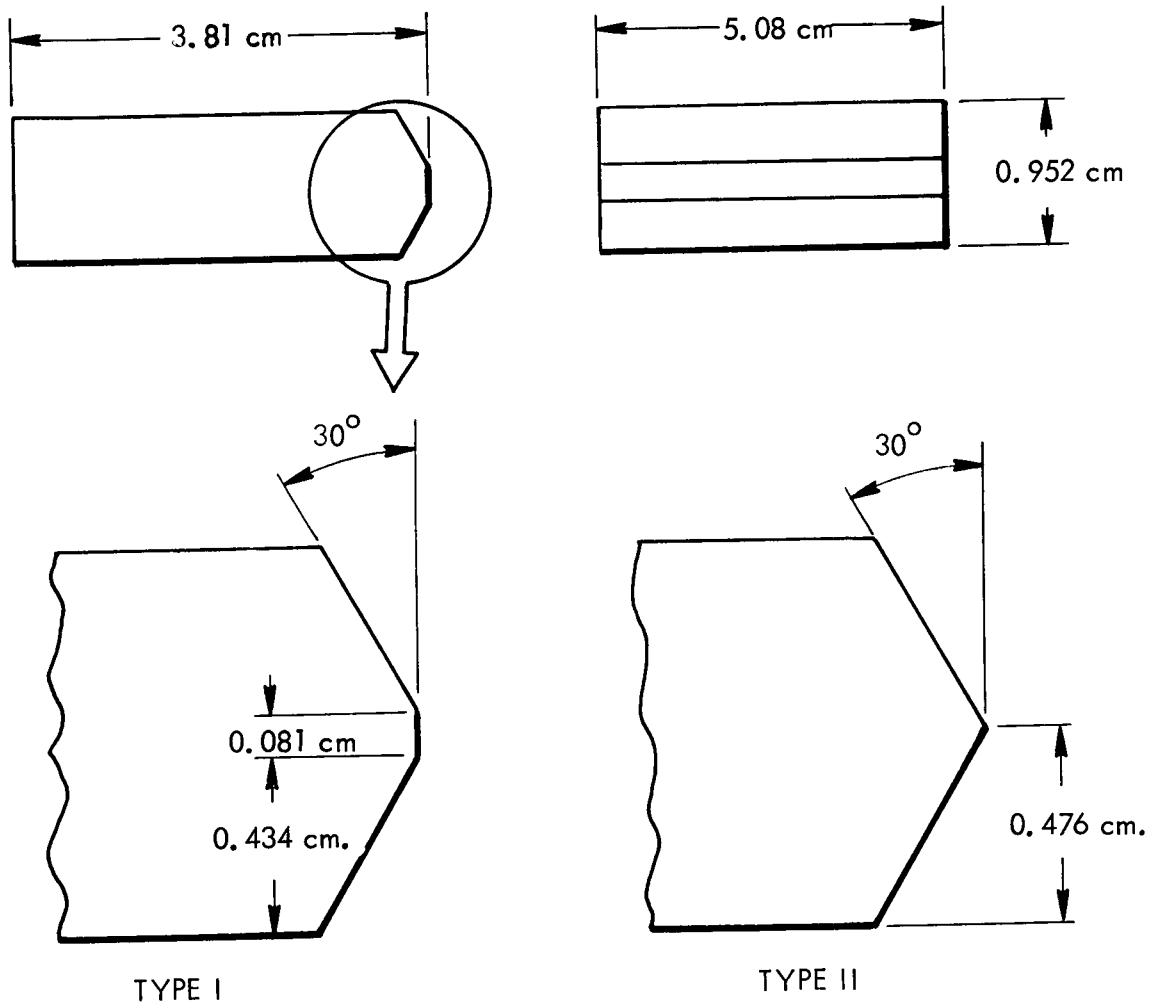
Configurations Used for Double "V" Plate Welds
